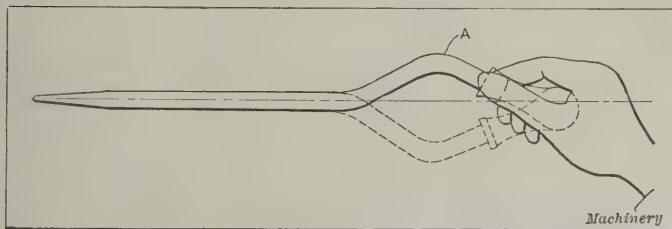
Illustration showing the Method of Operating the Screw Driver
